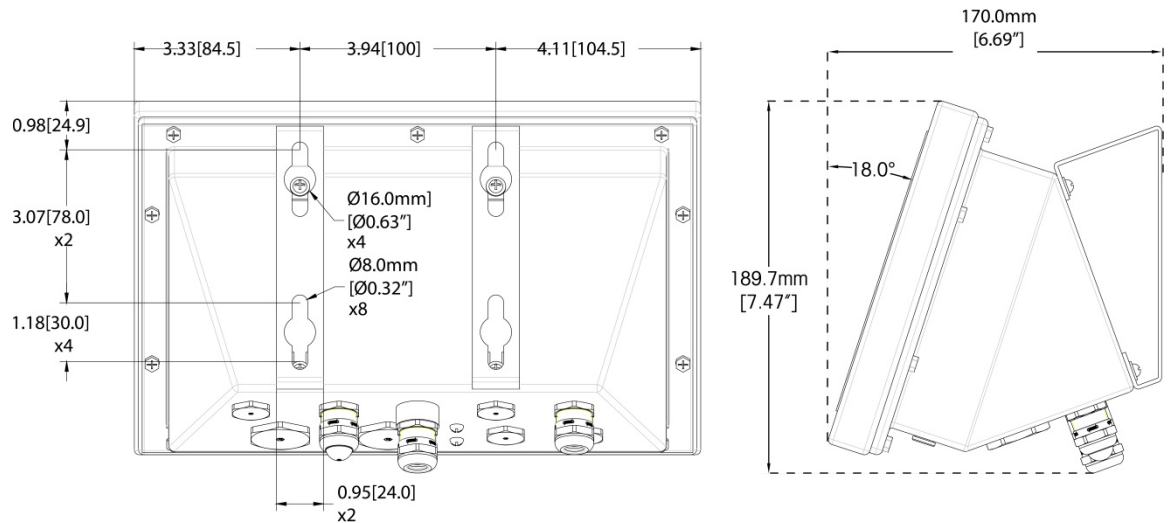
Harsh Environment Enclosure Dimensions with Fixed Angle Mounting Brackets for VESA Mounting
